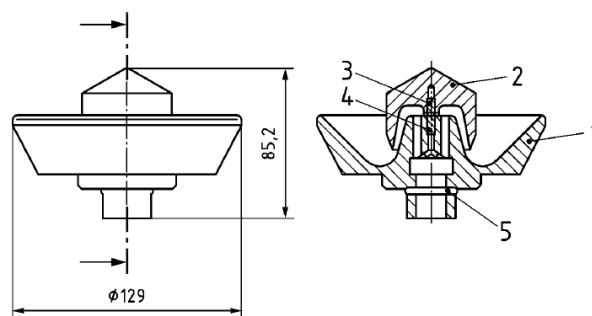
Technical drawing of the mushroom-cup nozzle; 1 cup; 2 cap (or mushroom); 3 grub screw; 4 hexagon socket; 5 O-ring seal; taken from ISO 80079-2
